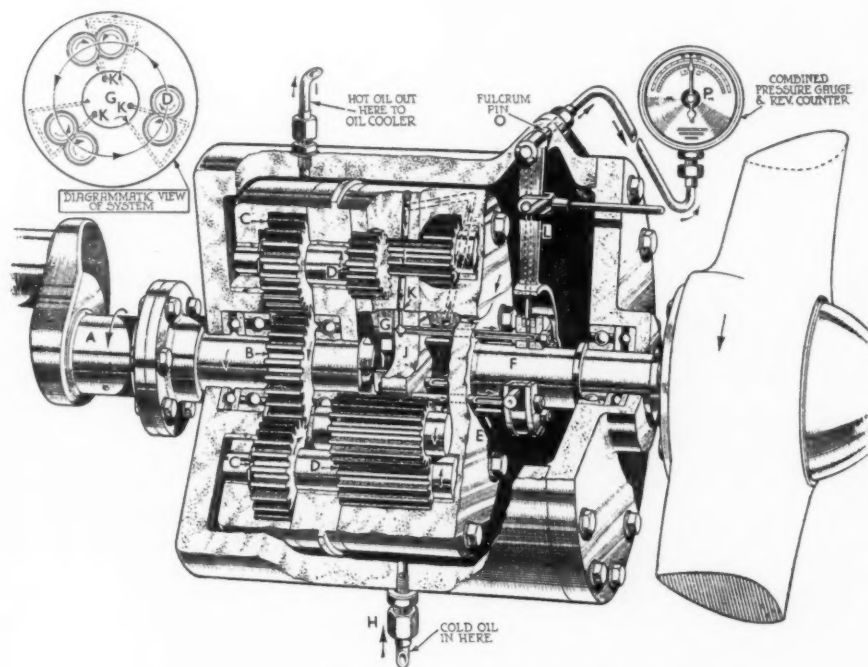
THE CARTER VARIABLE GEAR FOR AIRPLANE ENGINES
